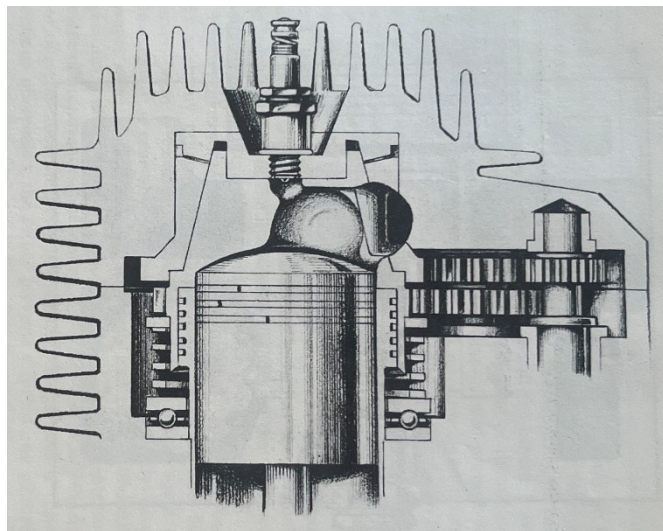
Aspin valve engine utilizing ver. 3 Aspin valve
